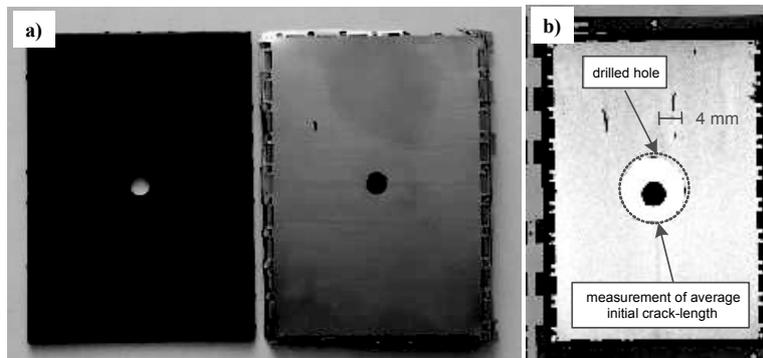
a) Geometry of the modified ball-on-ring sample and b) CSAM result indicating the initial crack size.
